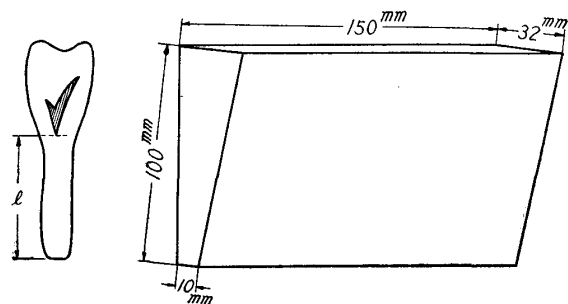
Size of shrinkage cavity test specimens (Green sand mold).
